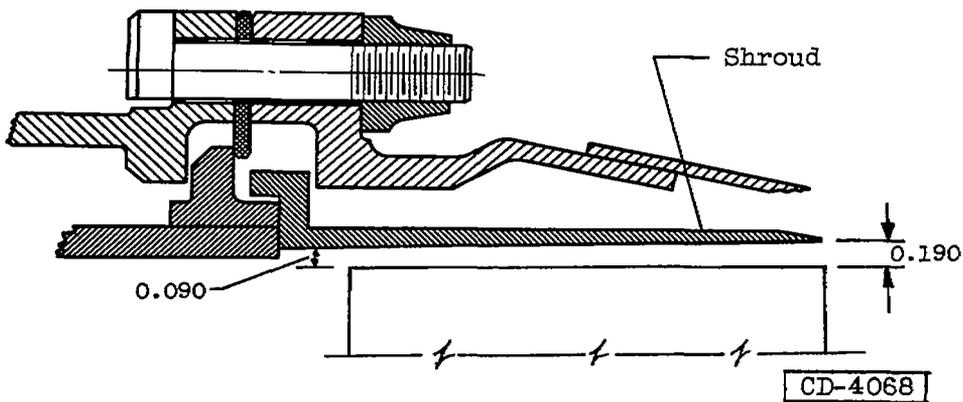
Conical flow fuel nozzle installed in engine combustion chamber.
